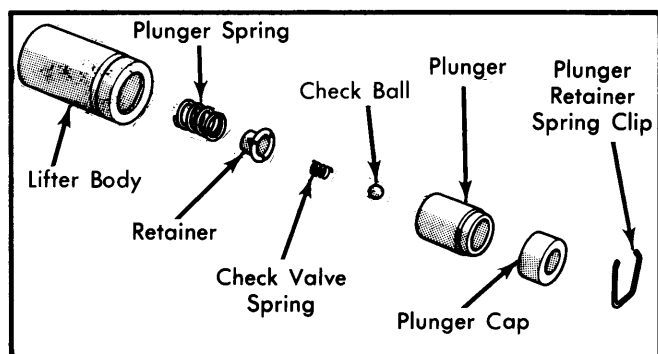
Exploded View of Hydraulic Lifter Assembly
